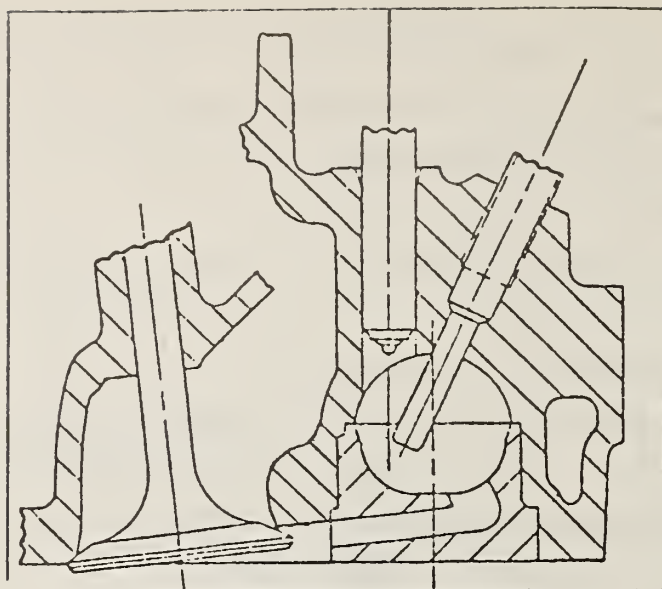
REVISED SWIRL CHAMBER DESIGN
